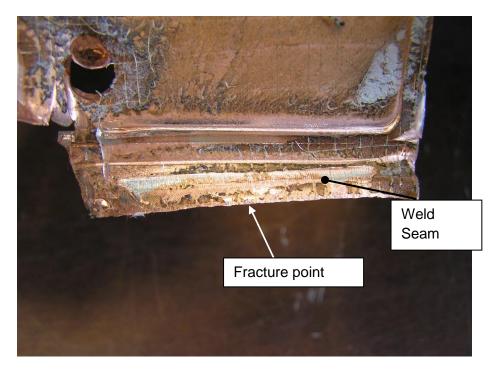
Fracture down one side of longitudinal weld seam (Image No. P1012790.jpg)
